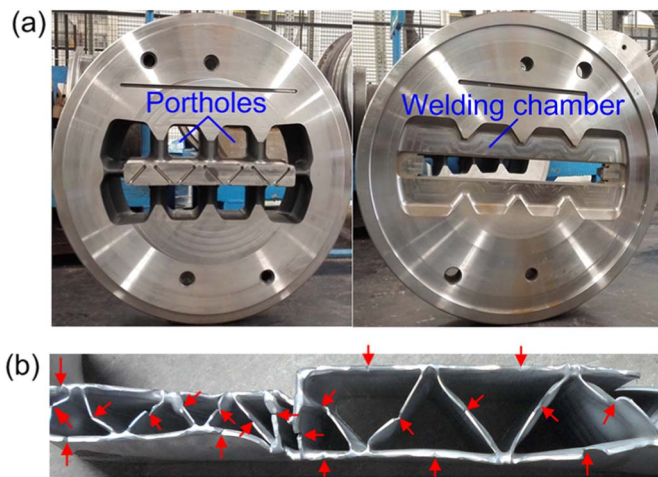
(a) A set of typical porthole dies, (b) the positions of weld seams in a profile extruded by a porthole die.
